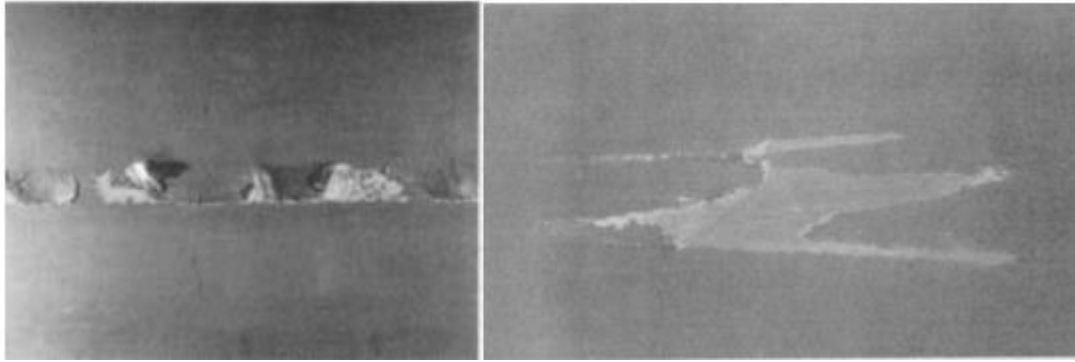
Sliver defects on the surface of sheet steel ⁵
